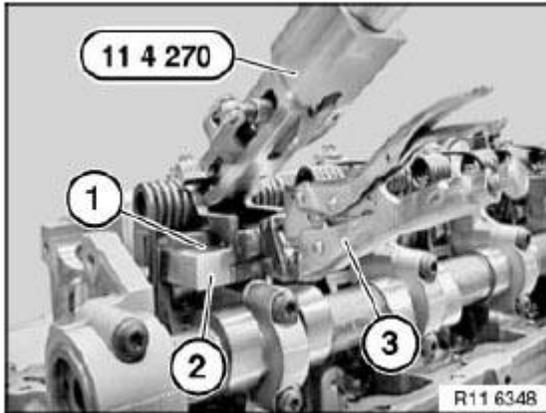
Identifying Gripping Pliers And Guide Block With Special Tool (11 4 270)
